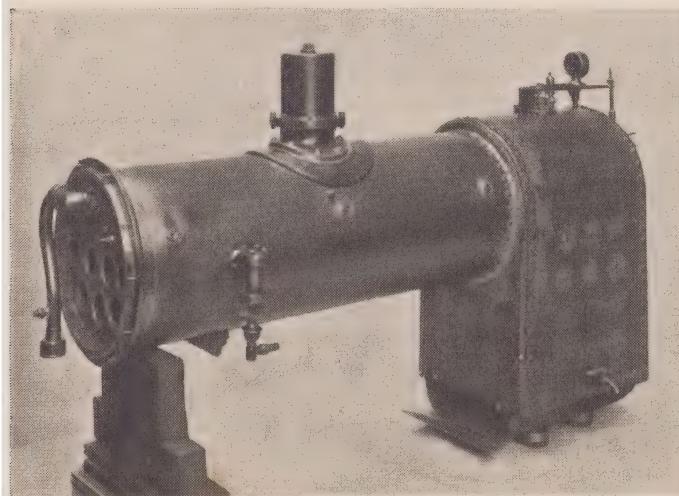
View showing Front Tube Plate and Ashpan Damper open.
